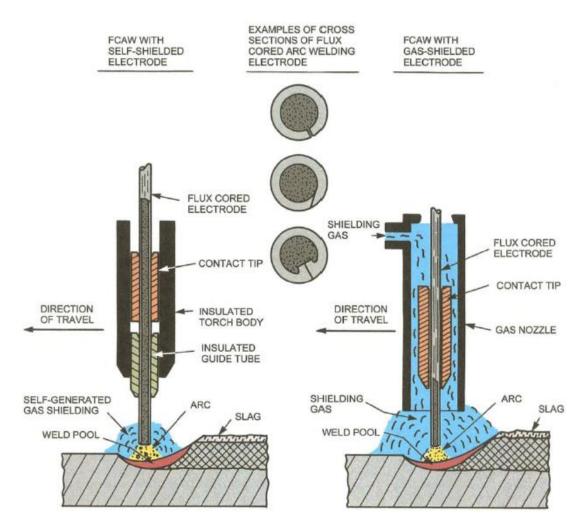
Self-shielded flux cored arc welding and gas-shielded flux cored arc welding. Available from Hobart Institute of Welding Technology (2012).
